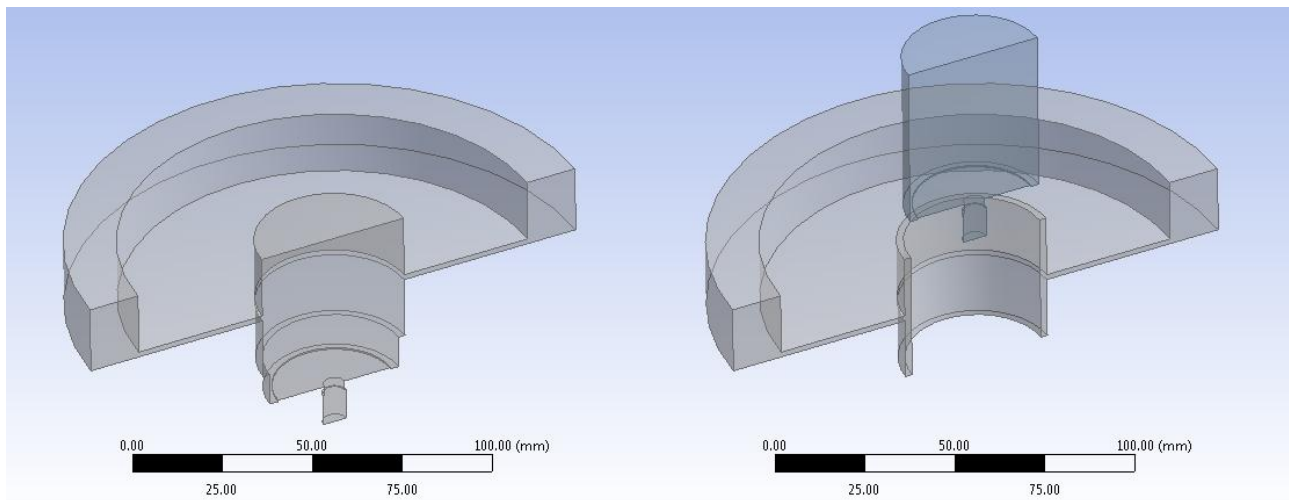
Half-sections of the test specimen geometries, left: monolithic, right: shrink fitted assembly.
